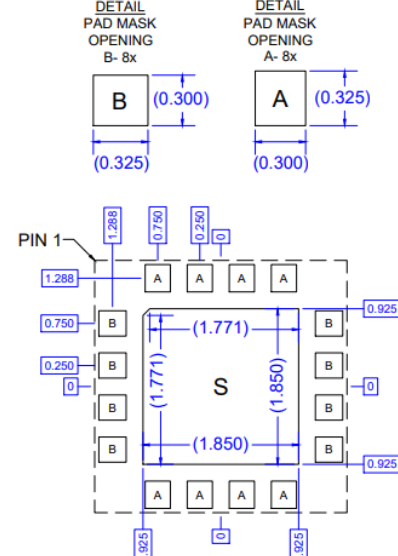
PCB Footprint Recommended Solder Mask Pattern
